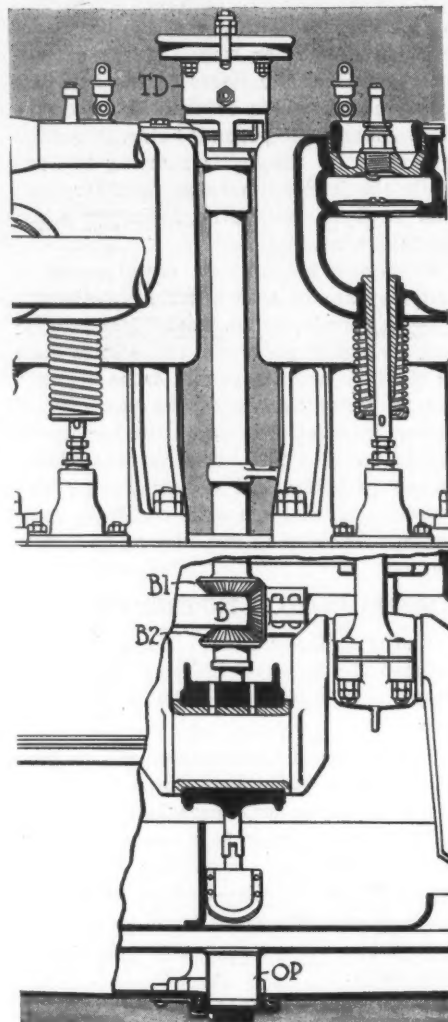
OILER AND DISTRIBUTOR DRIVE
